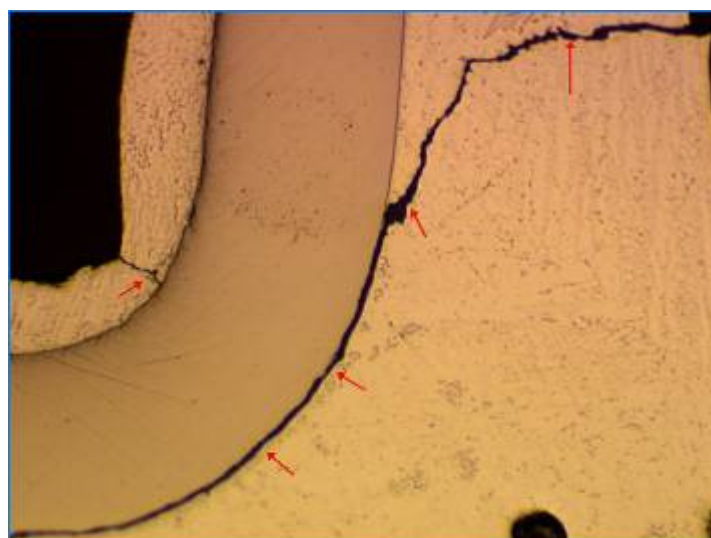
cross section, SN79, U12, left lead solder crack, 200xb
